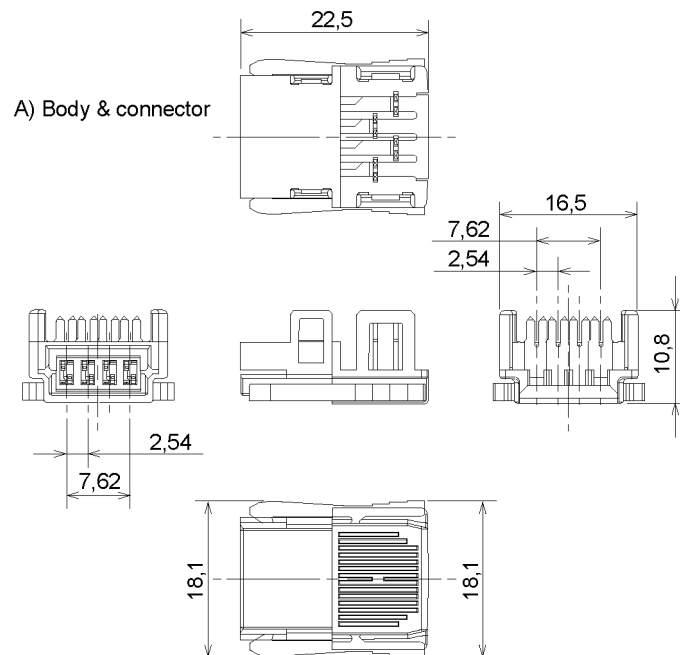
PhL-P flat cable connector and terminal cover – body and connector
